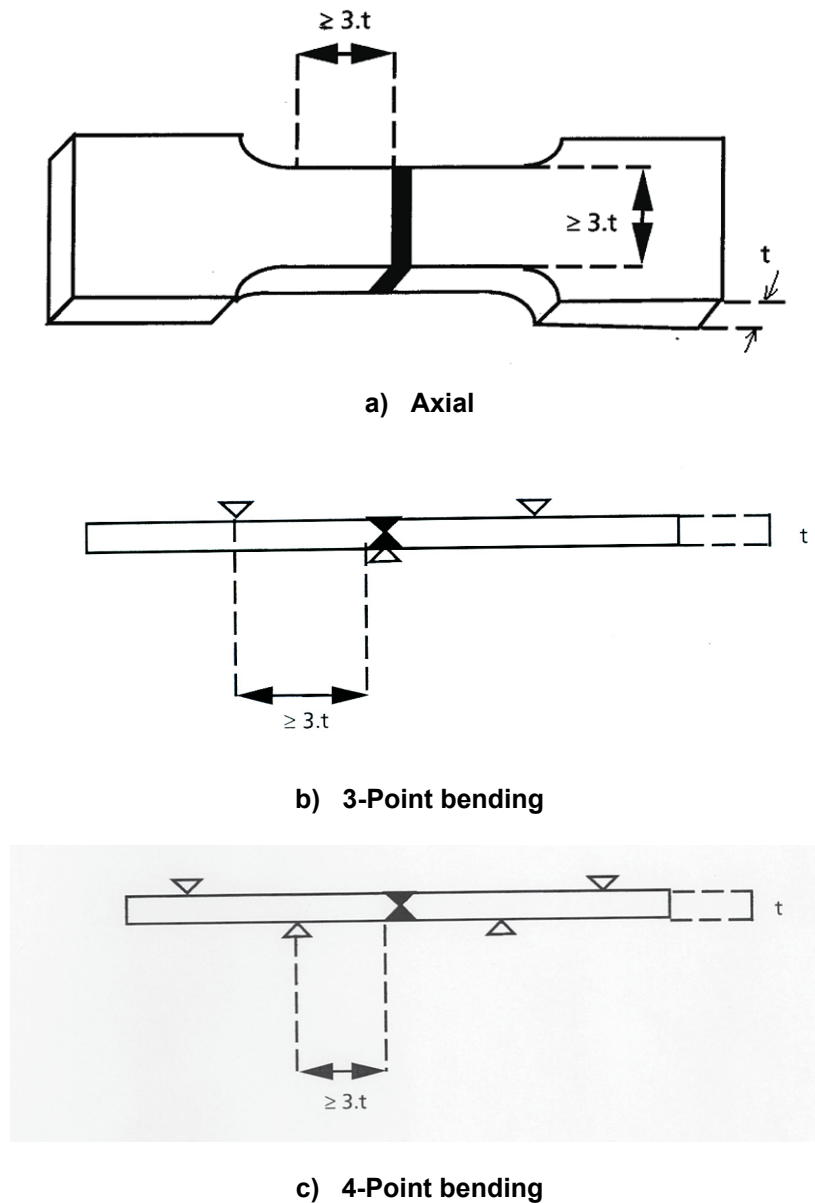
Geometrical characteristics of welded specimens loaded in tension or bending
